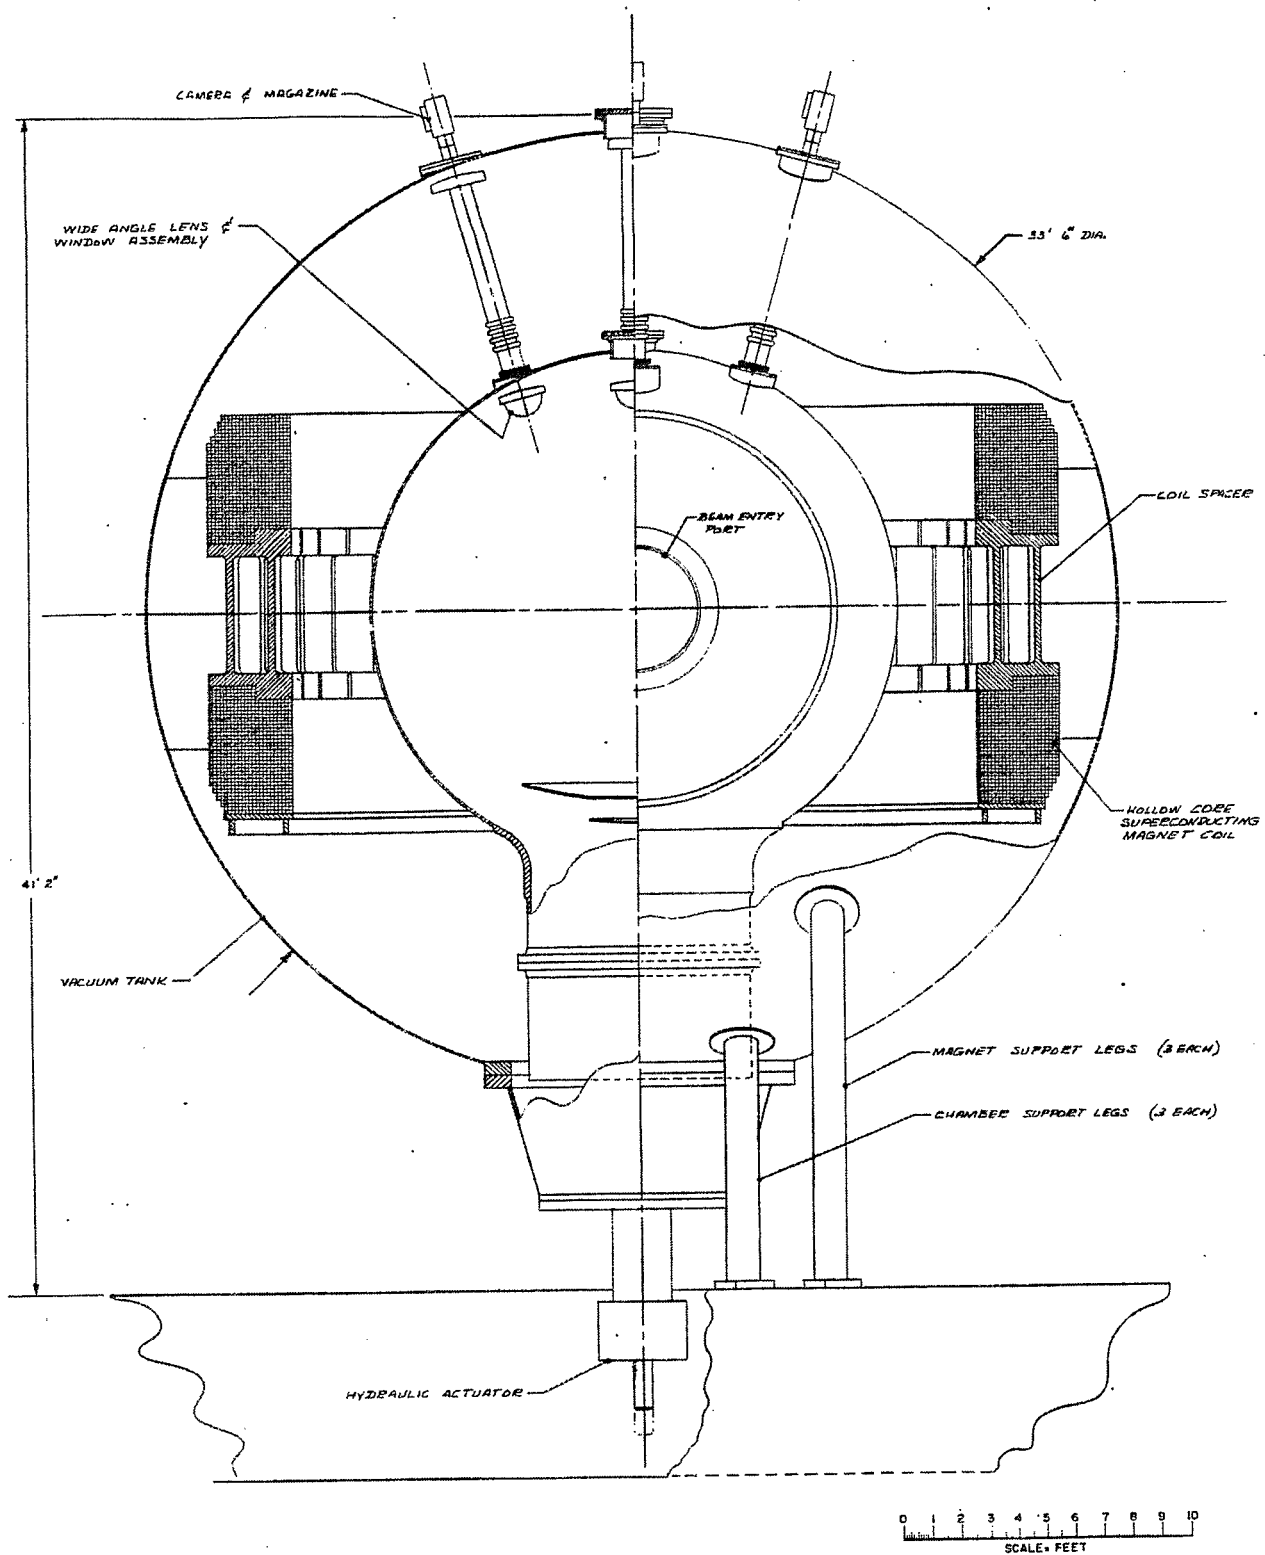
25-ft bubble chamber main assembly - front elevation sectioned view.
